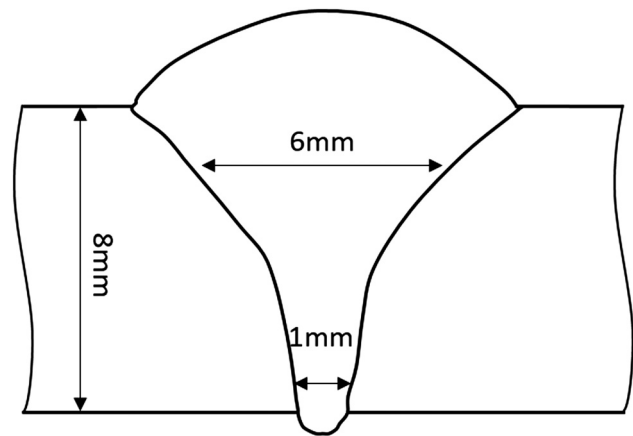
GMA-LAHW weld seam; schematic.
